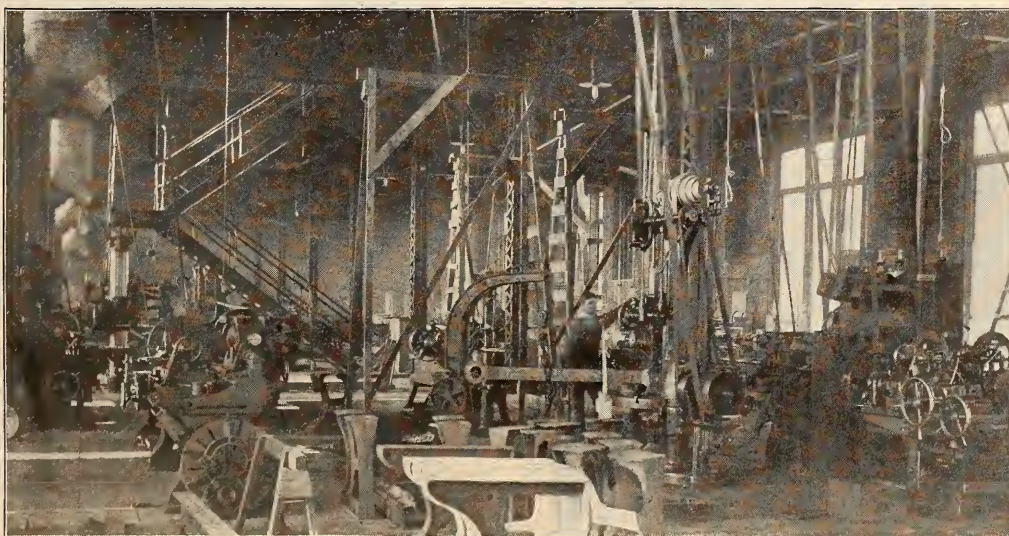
VIEW IN MACHINE SIDE OF LOCOMOTIVE AND MACHINE SHOP—TERMINAL R. R. OF ST. L.
